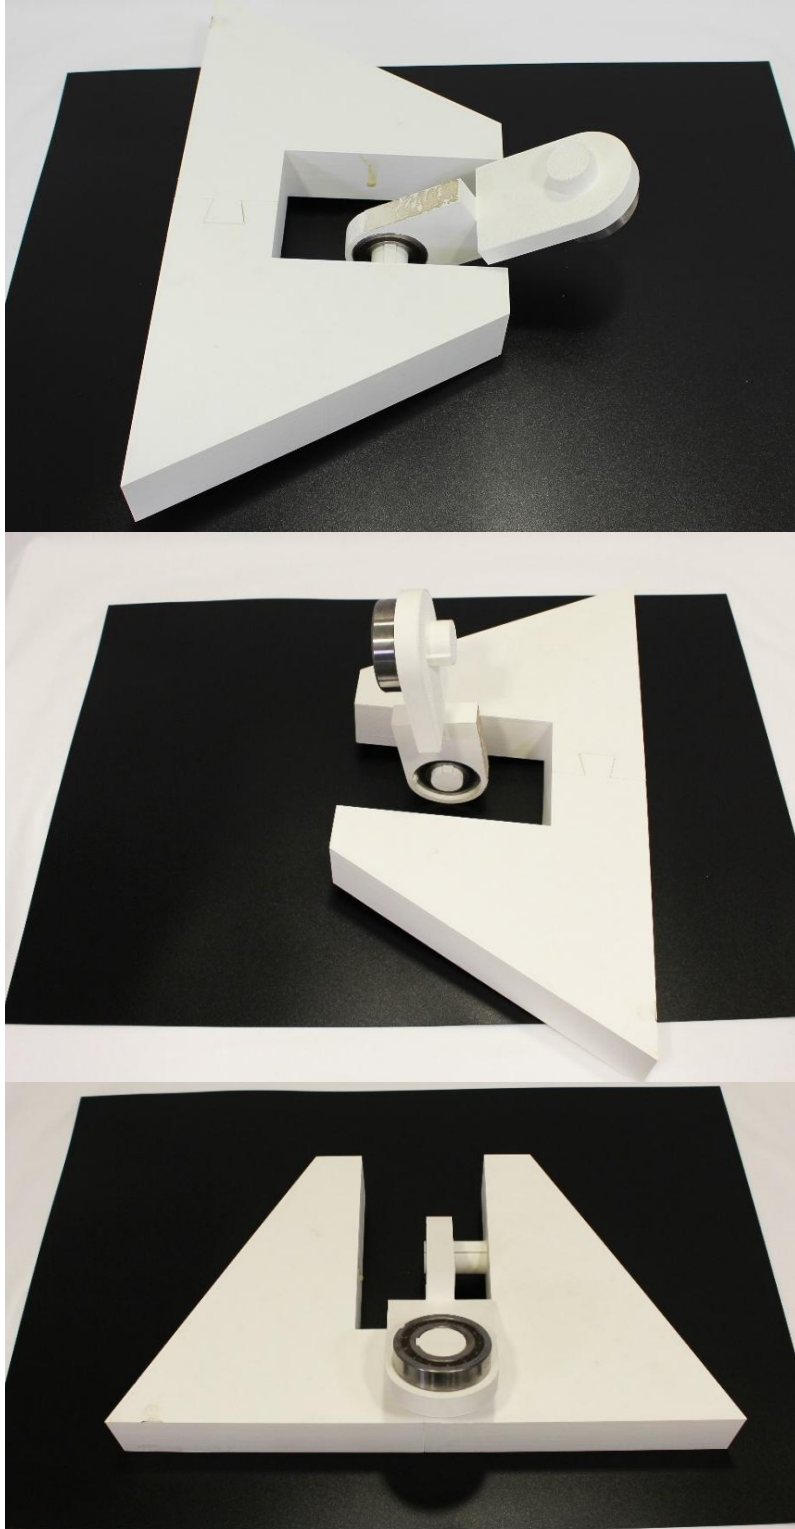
Pitch rotation check of Dual Axis one way bearing systems- mark 3- assembly type 2
